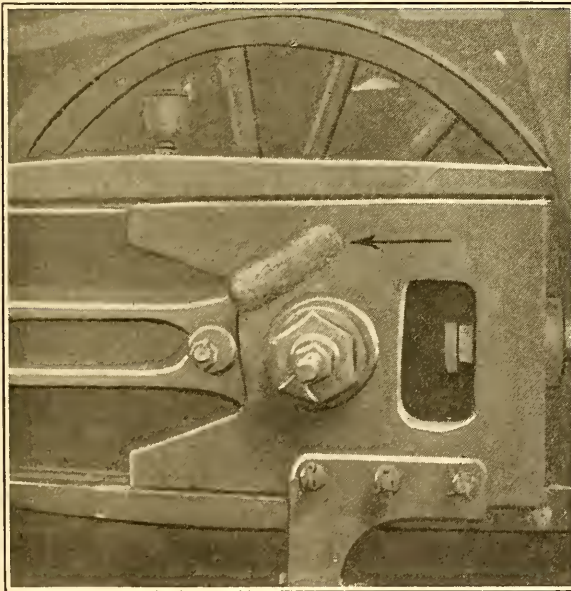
Weld Completed and Crosshead in Service.
